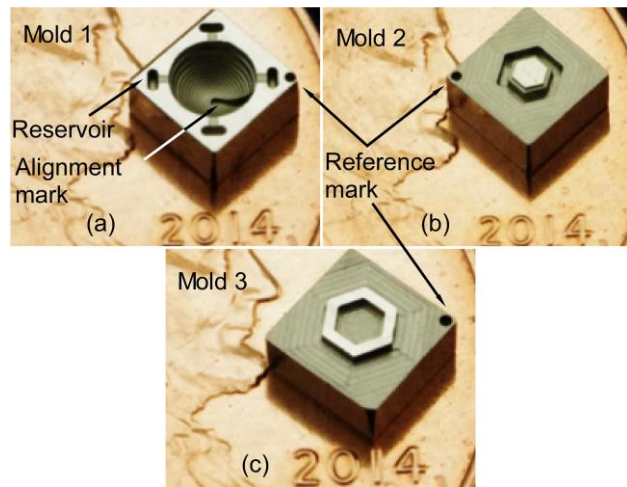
Inside features of  $\mu$ EDMed stainless steel molds (a) Mold 1, (b) Mold 2, and (c) Mold 3.
